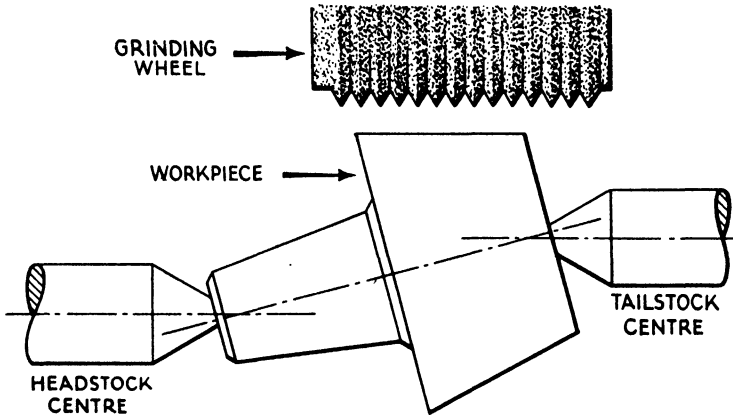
GRINDING TAPERED THREAD BY OFF-SETTING TAILSTOCK CENTRE
